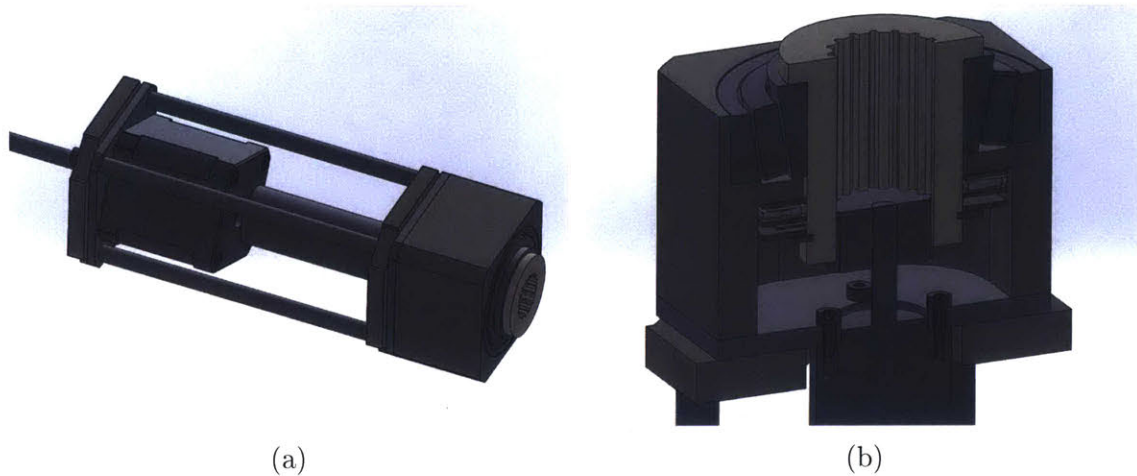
Model of (a) the bearing cart and (b) a cutaway of the bearing block showing the internal construction.
